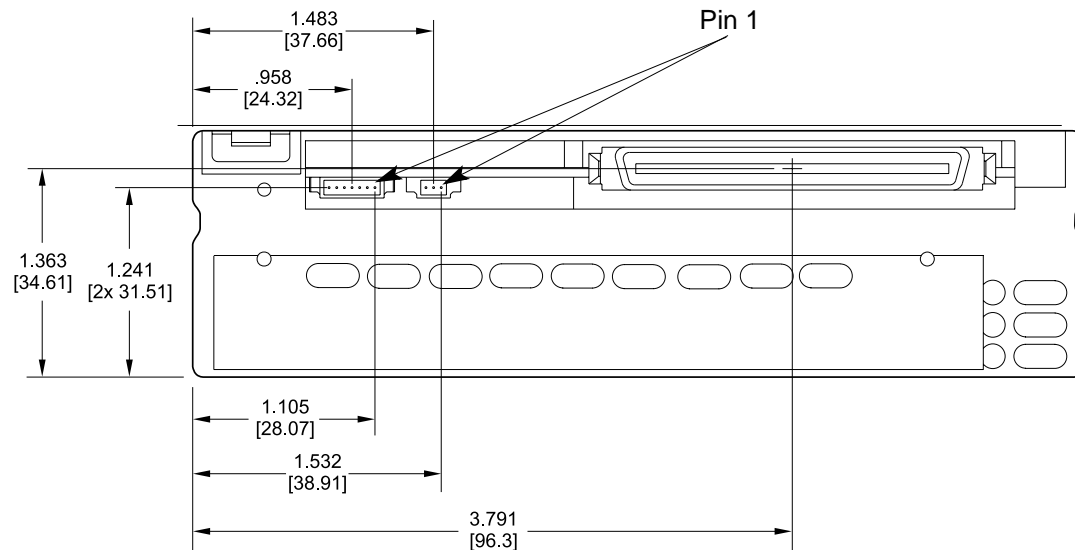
Fibre Channel tape drive back-panel connector locations in inches (millimeters)
